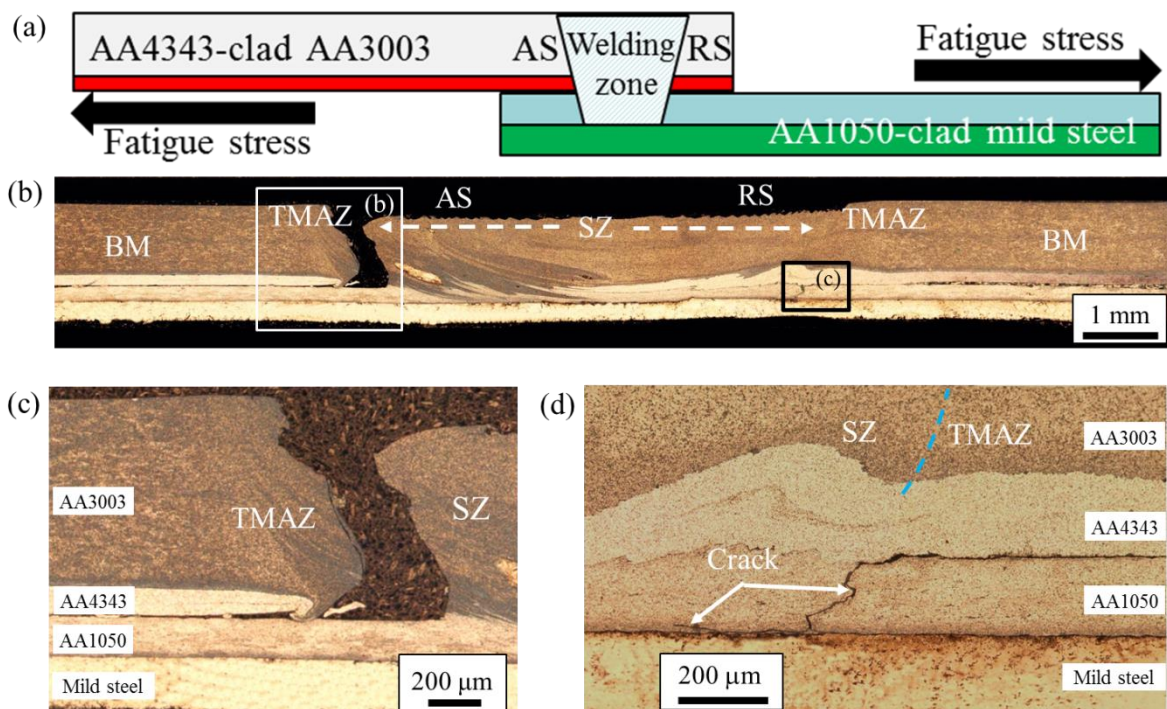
(a) Schematic of loading mode, (b) cross section of the fatigue fractured of AS-loaded joint (50 MPa), (c) fatigue fractured crack in the junction of TMAZ and SZ (AS), (d) fatigue crack on the RS.
